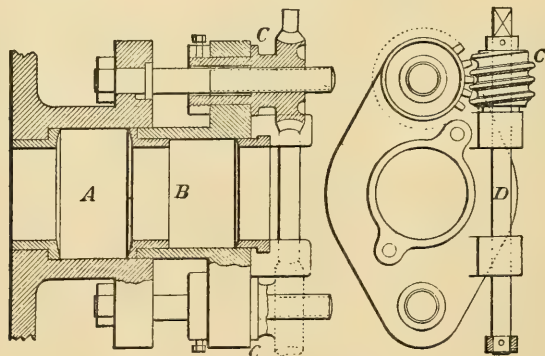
Piston-rod Gland with Adjusting Gear.
